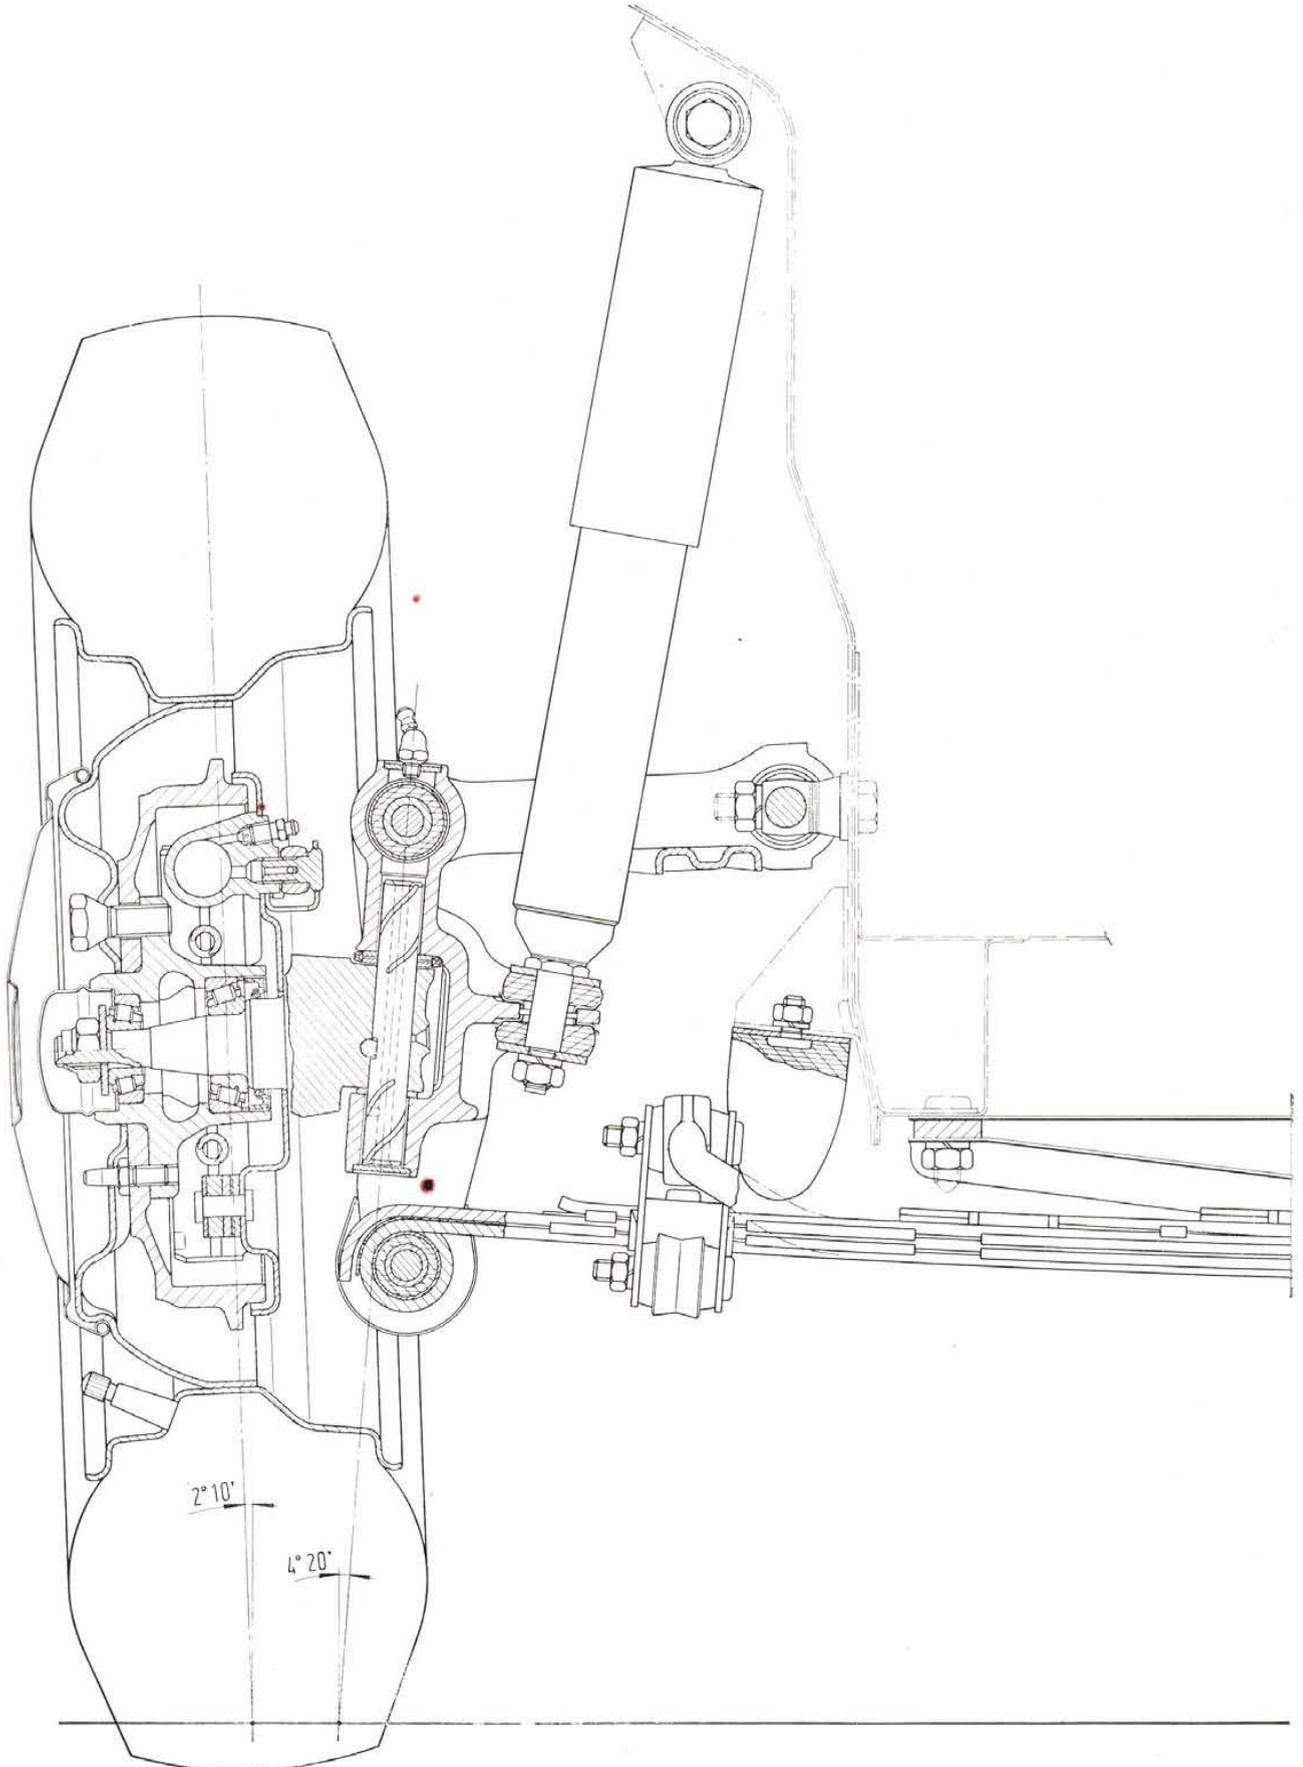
Sectional view of left side front suspension and wheel assembly.
